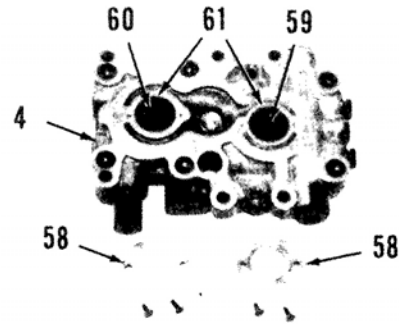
View showing port block (4) with flange covers (58) removed. Note pump side needle bearing (59), motor side needle bearing (60) and oil seals (61).
